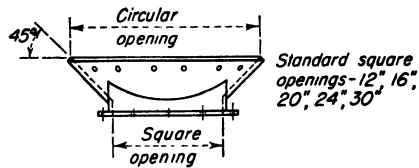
Beaumont Birch Co. cylindrical bunker adaptor.
